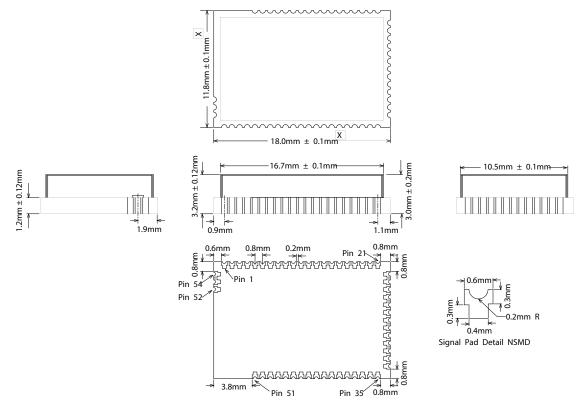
BC127-EXT, BC127-EXT-HD Mechanical Drawing
